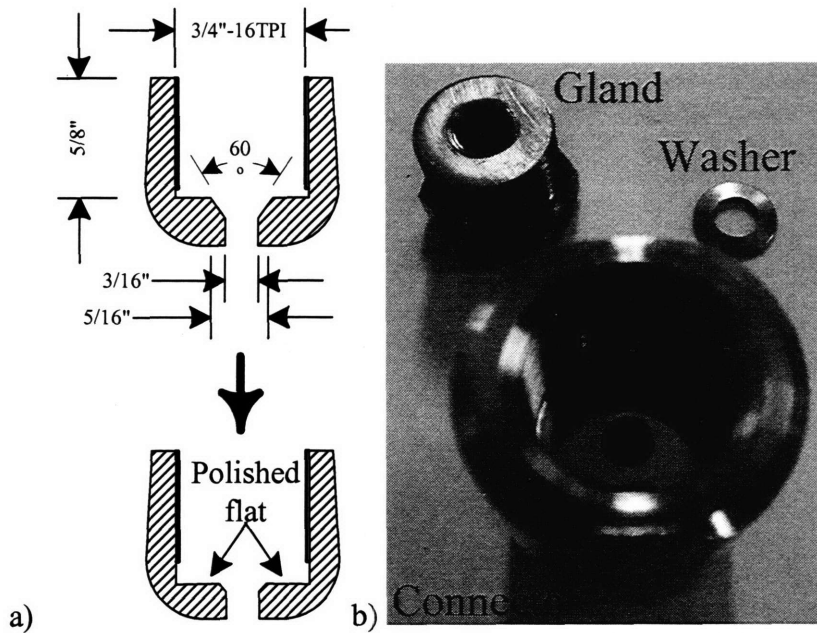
(a) Drawing of HiP socket before and after machining and (b) Pictures of the modified connector with the polished sealing surface (mirror-like), the gland with its face flattened, and one of the four Bellevue washers used together to maintain the seal.
